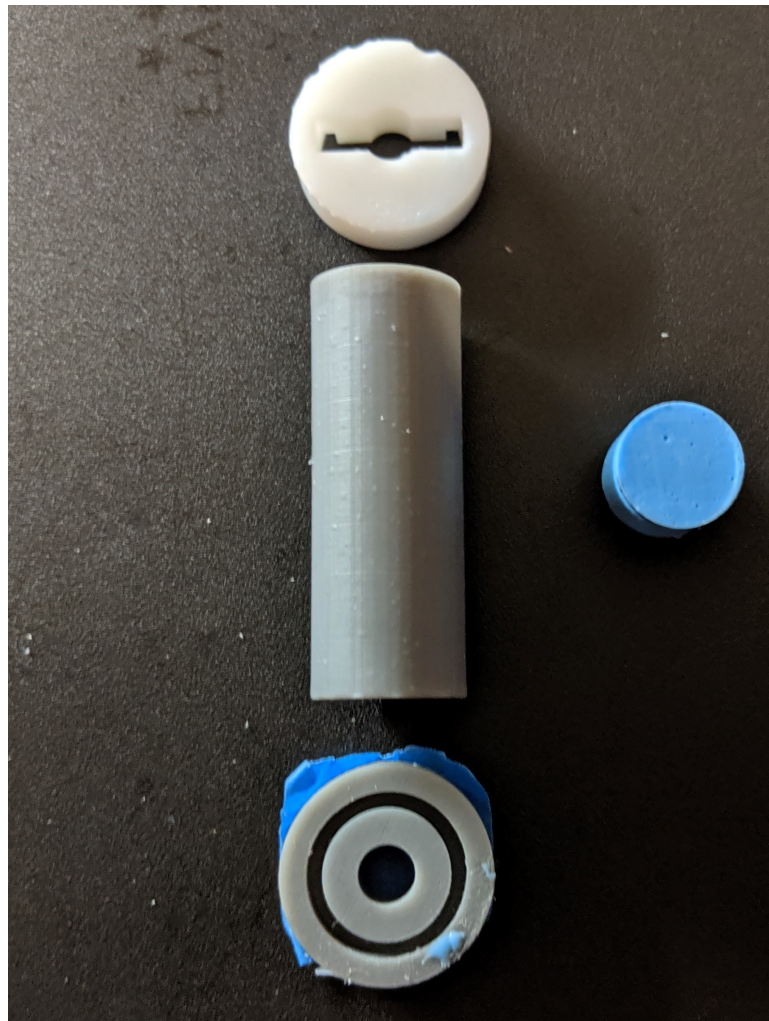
Pneumatic End Cap Mold Tool and the completed End Cap
